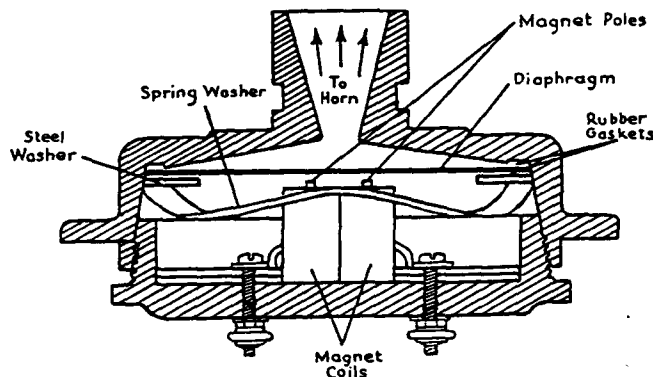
CROSS SECTION VIEW OF SOUND UNIT (HORN TYPE).
